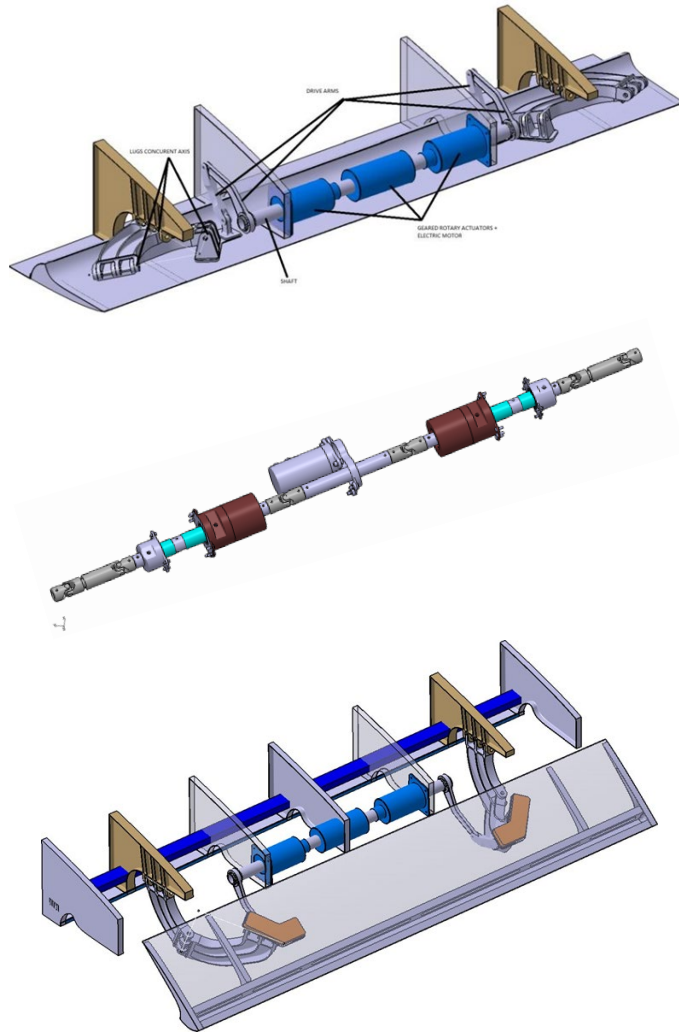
“Butterfly” mechanism, actuation chain (detailed) and Krueger flap Internal structure. Axonometric view
